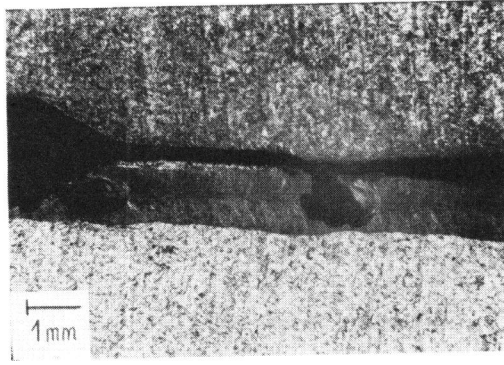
Fracture of the EB-welded specimen at 4 K
